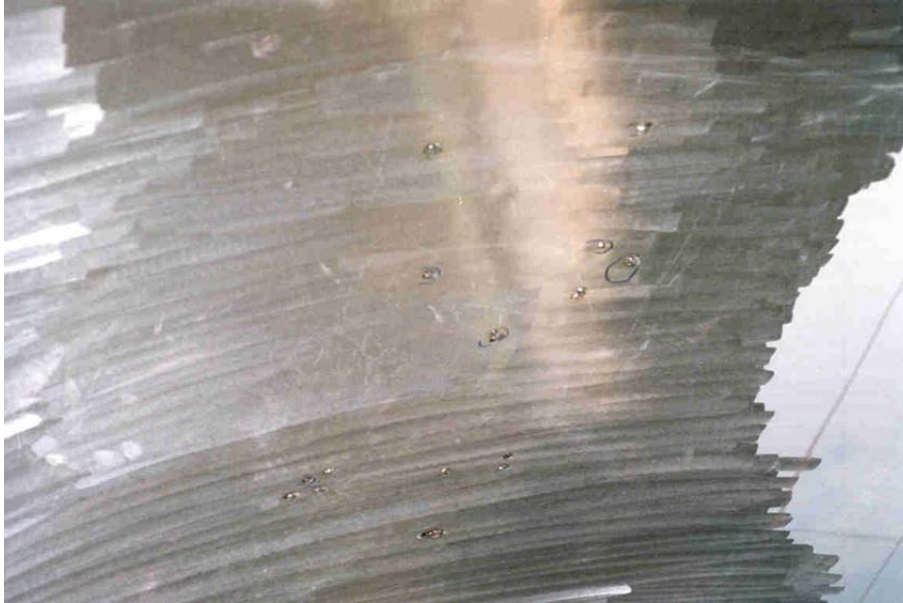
Many pits were so deep that they could not be removed completely by grinding without thinning the material below the minimum required wall thickness. Consequently it was necessary to perform repair welding.
